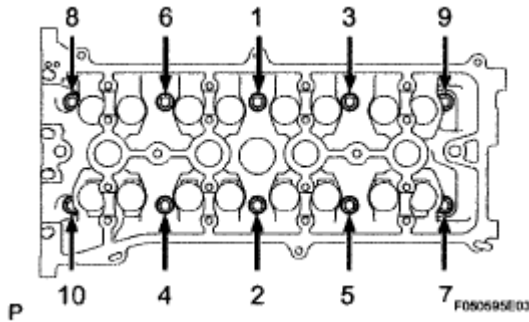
Identifying Cylinder Set Head Bolts Tighten Sequence
